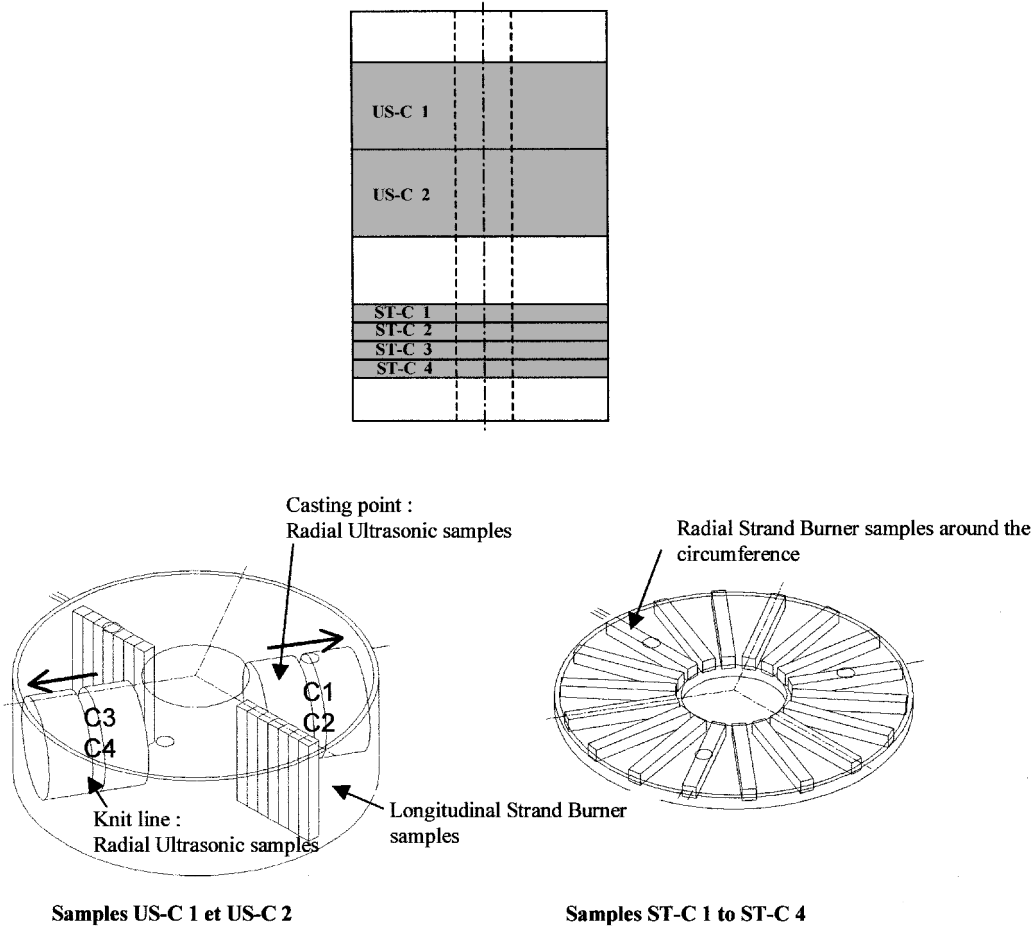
Cutaway of a Silvan grain: location of burning rate samples (three-points casting, C process).
